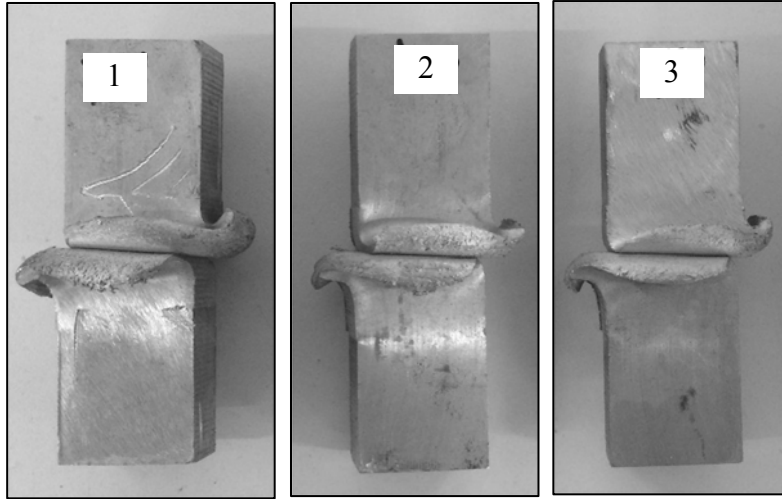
2 Macroscopic morphologies of the linear friction welds.
